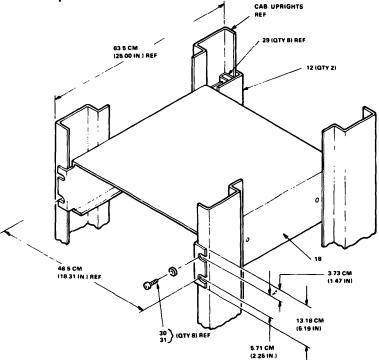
BA11-NE and BA11-NF Cover Mounting Dimensions
